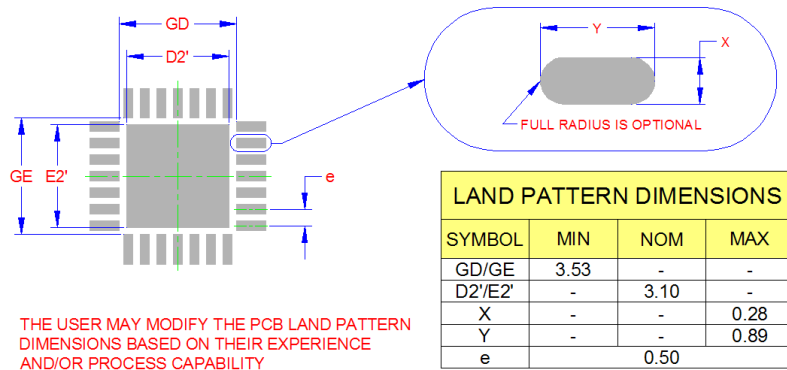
Recommended Printed Circuit Board (PCB) Land Pattern
